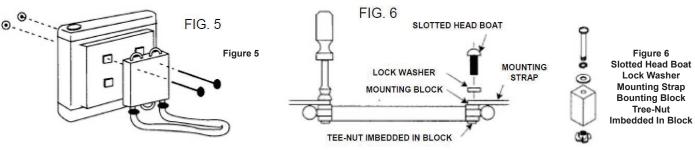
Illustration of how to connect the cooler to the radiator with rods and buttons.
